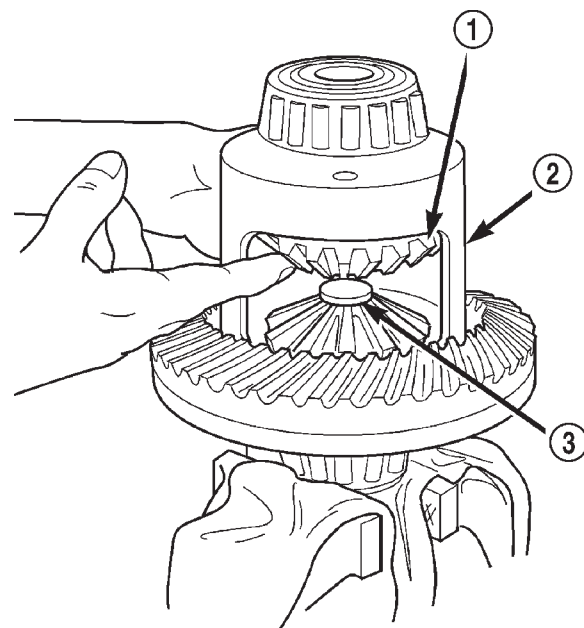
Upper Side Gear & Clutch Disc Pack Installation
